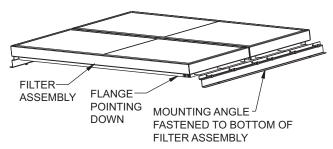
Correctly Assembled Bottom Filter Assembly (Sizes 040-060 Only)
